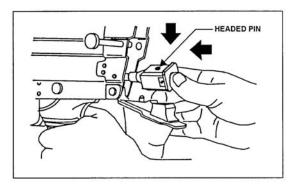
Replacement of the return rod and transfer mechanism assembly
